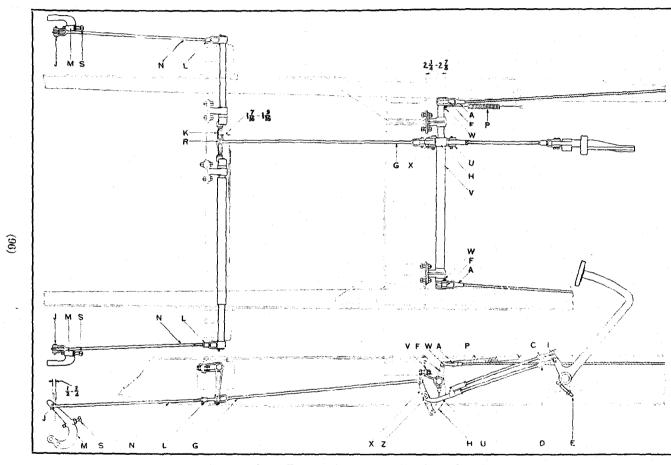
V-63 Foot Brake Rods to Rear Wheel Brakes (Second Type)
